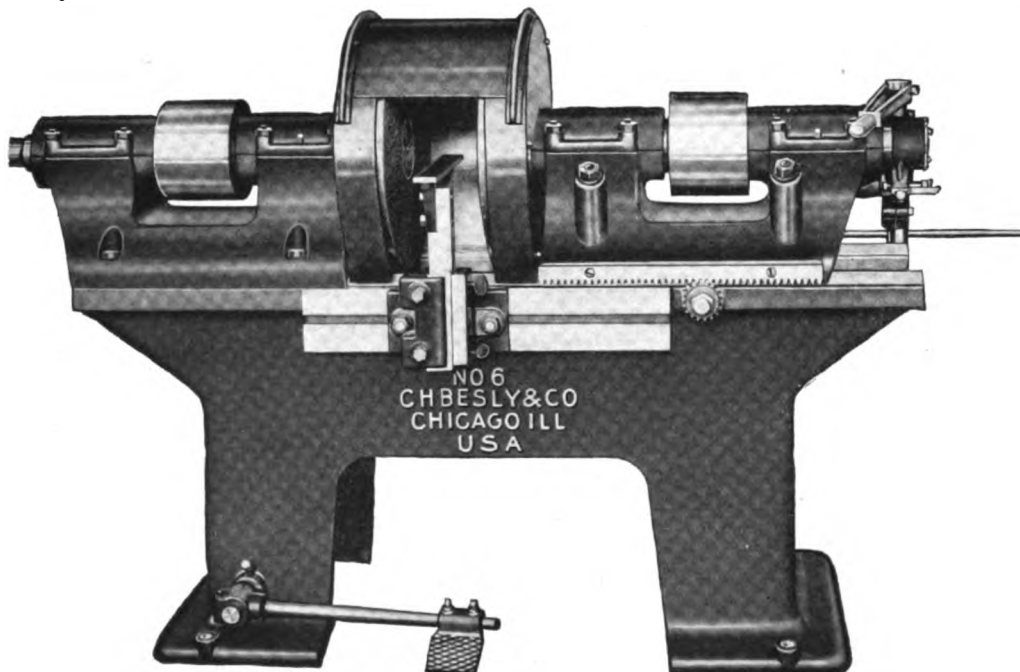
Double Spindle Besly Grinder, No. 6-20
